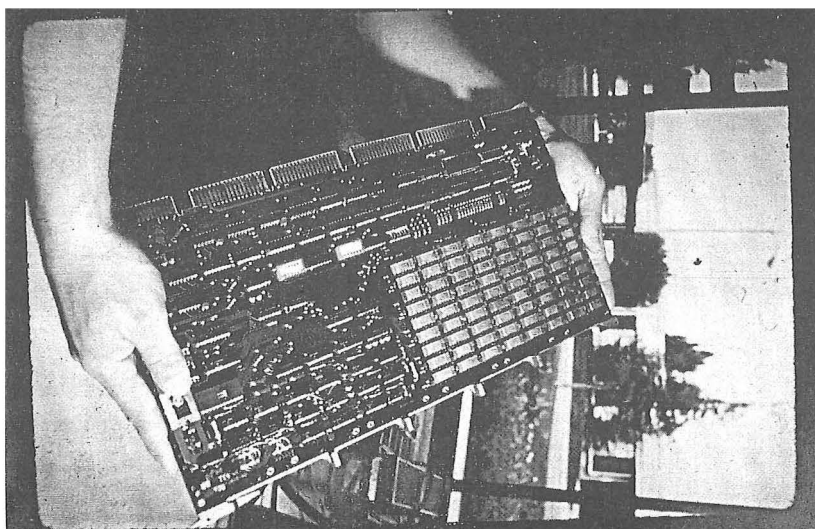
Chip dimensions are extremely small compared to p-c board dimensions.
